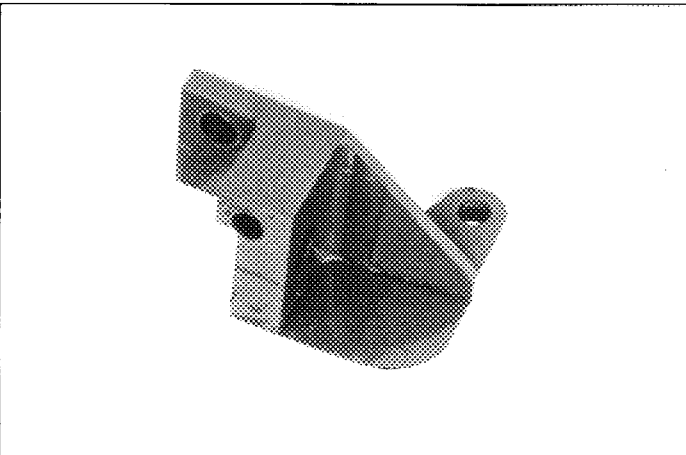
Heavy duty steering knuckle arm TYPE D
